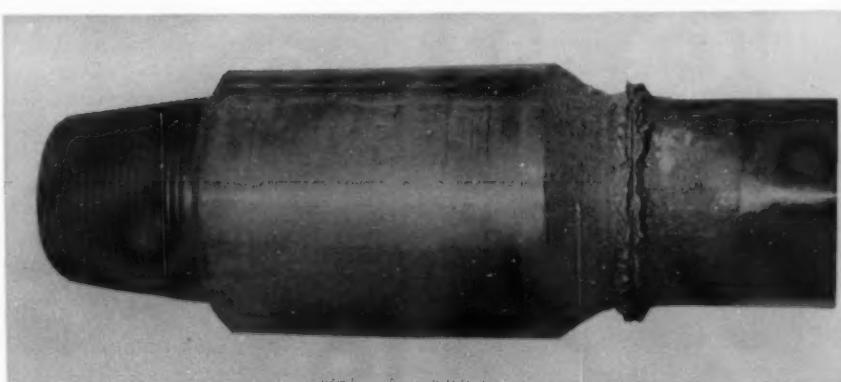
(right) Tool joint after it has been flash-welded to end of pipe. Weld area is cleaned up by machining as shown in *Fig. 1*.
